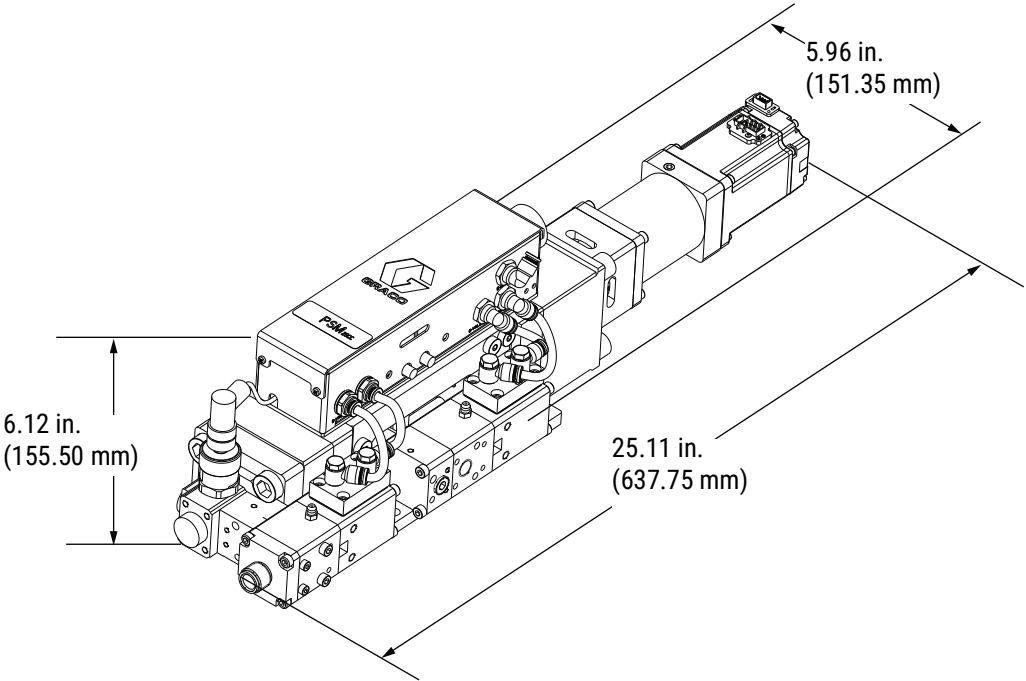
PSM Ambient Metering Unit Dimensions, 25cc
